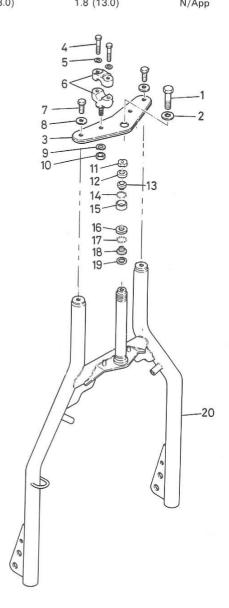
Front fork and steering head – KLT110 A1, KLT200 A, B – typical (Sec 3)
